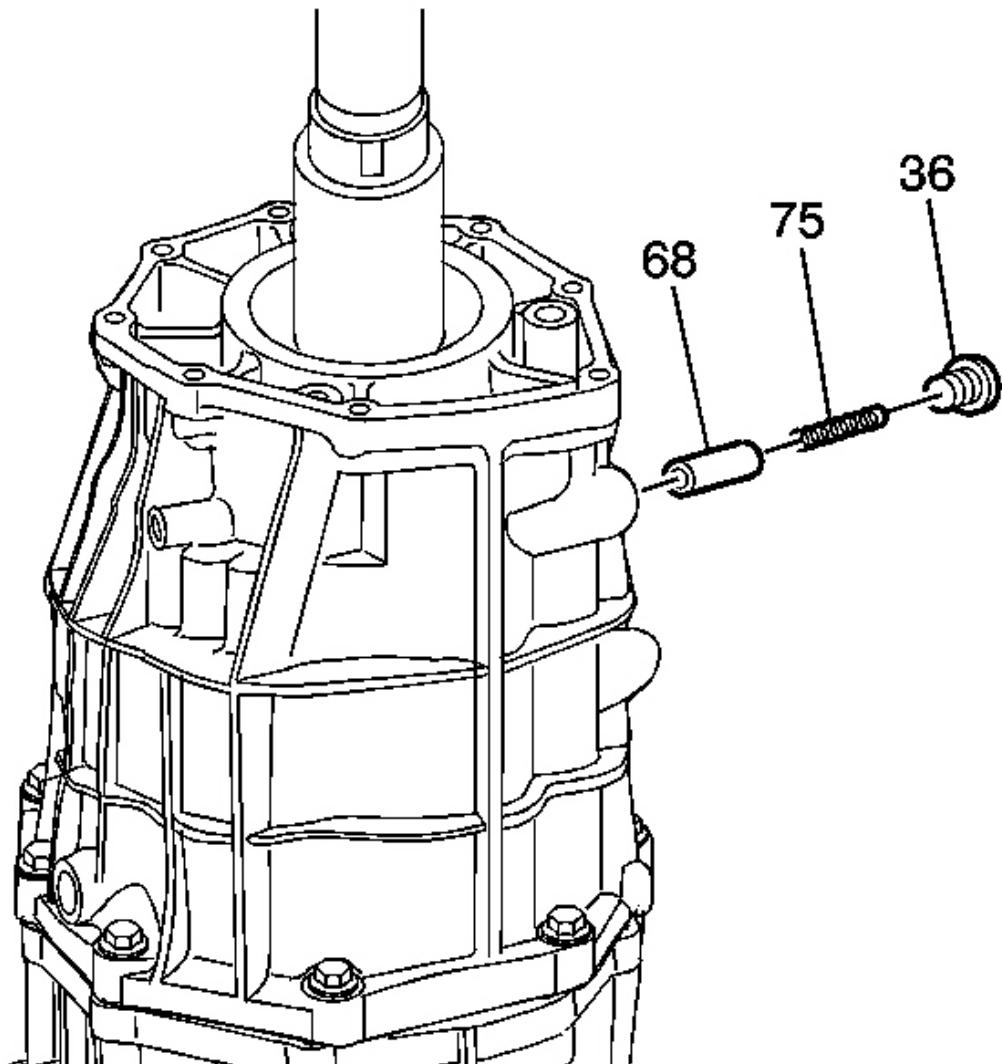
View Of Shift Shaft Detent Plug, Spring & Pin
